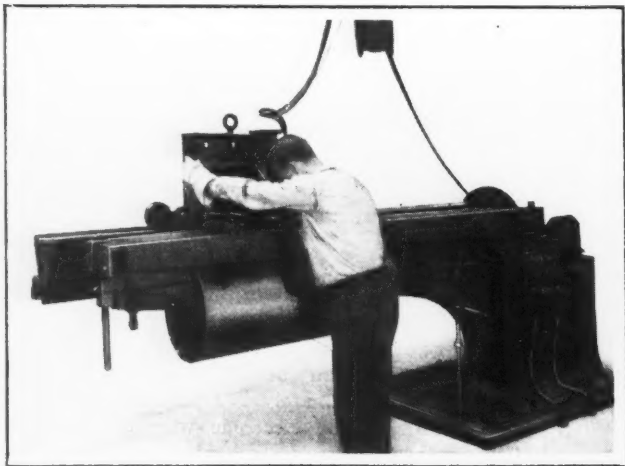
Application of the "Auto-Arc" Welder
